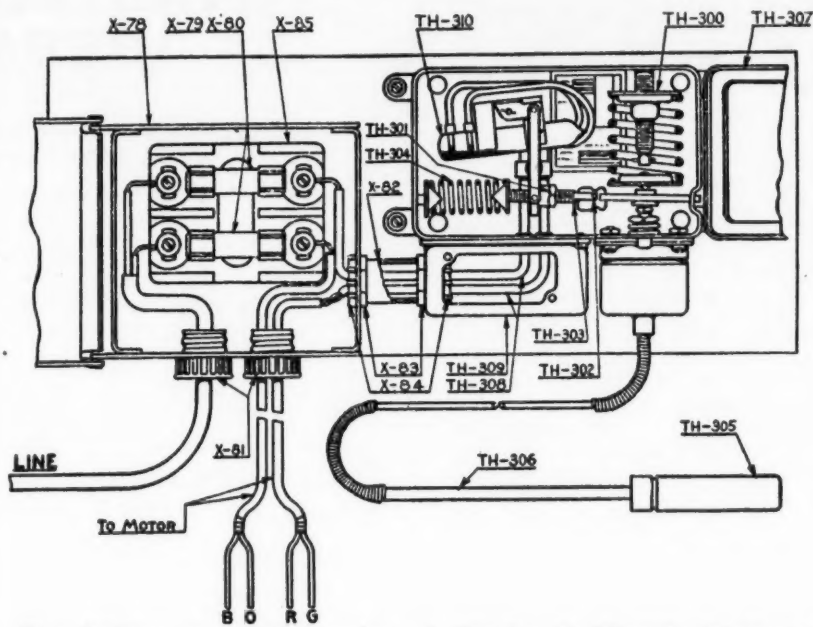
Cross sectional drawing of the Socold Mercoide thermostat.
